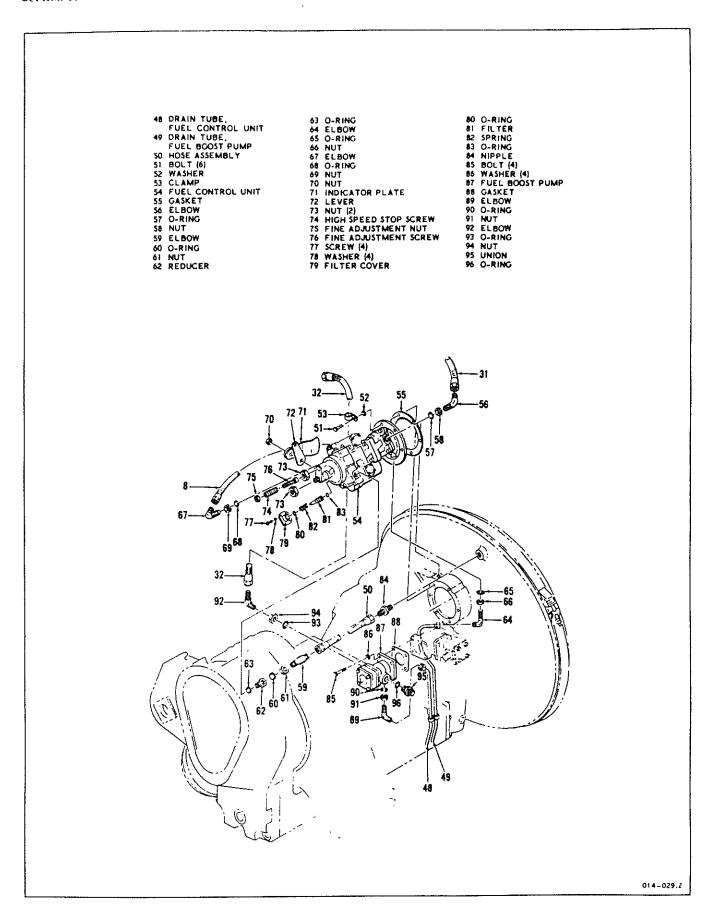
Fuel System Installation, Exploded View (Sheet 2 of 2)
